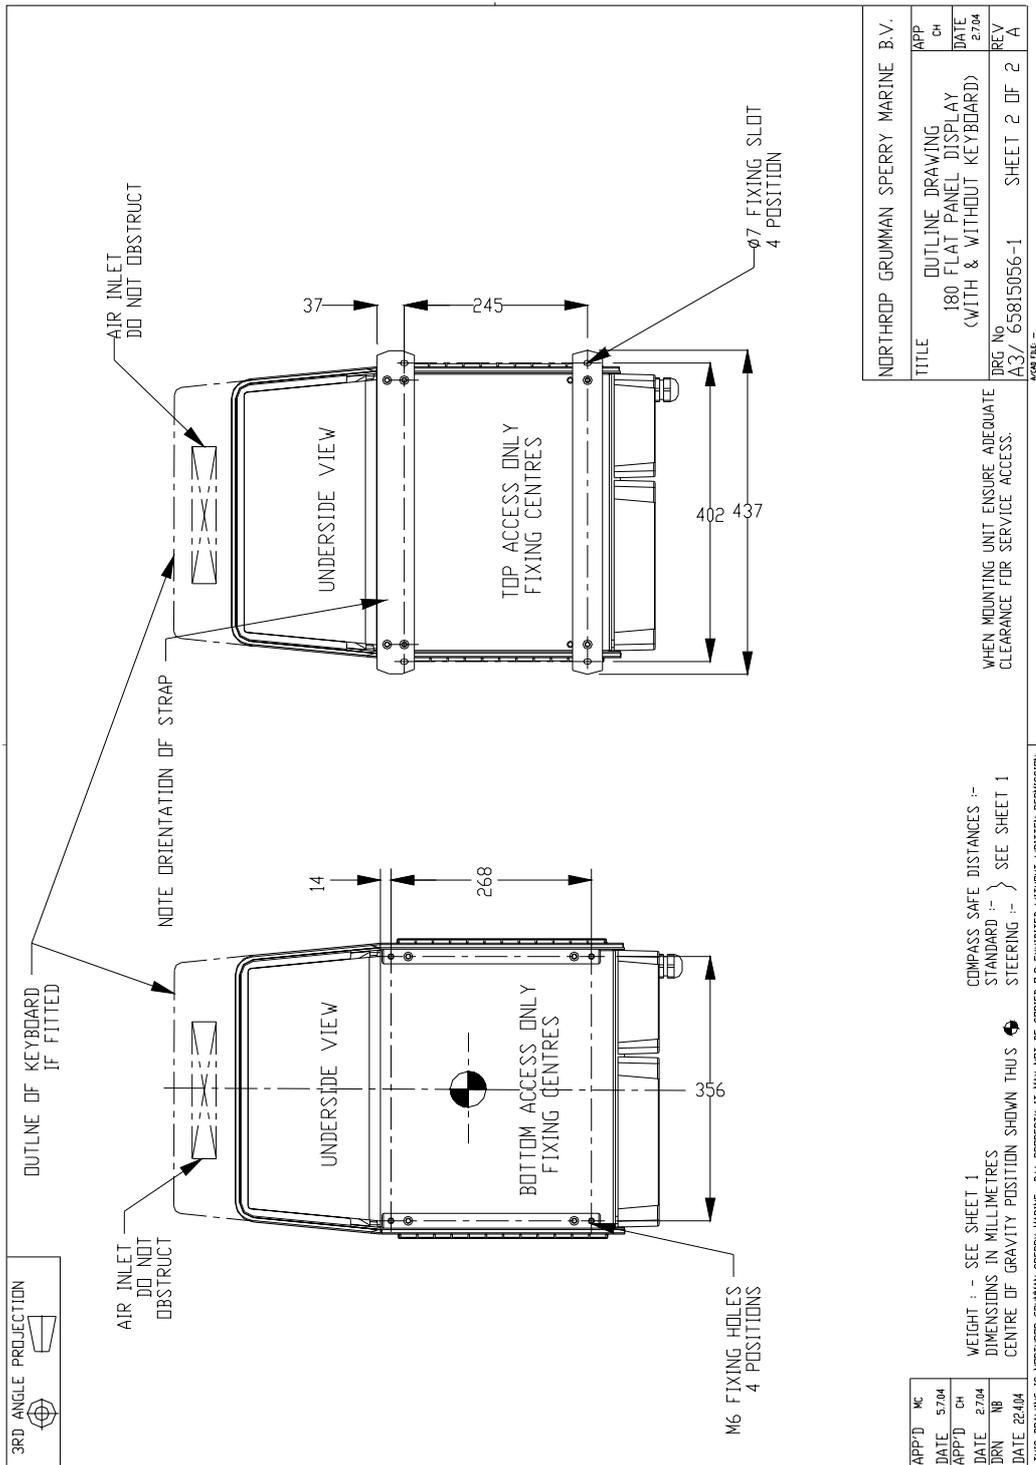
180 Display Unit (FPD) Outline Drawing
